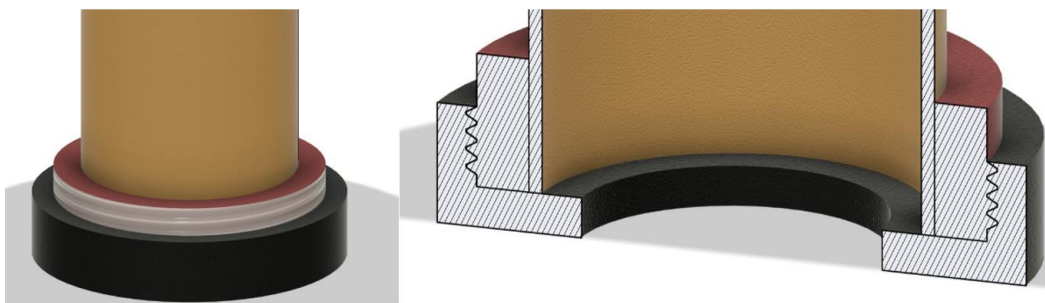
3D printing retainer for ASA filament to hold the motor
